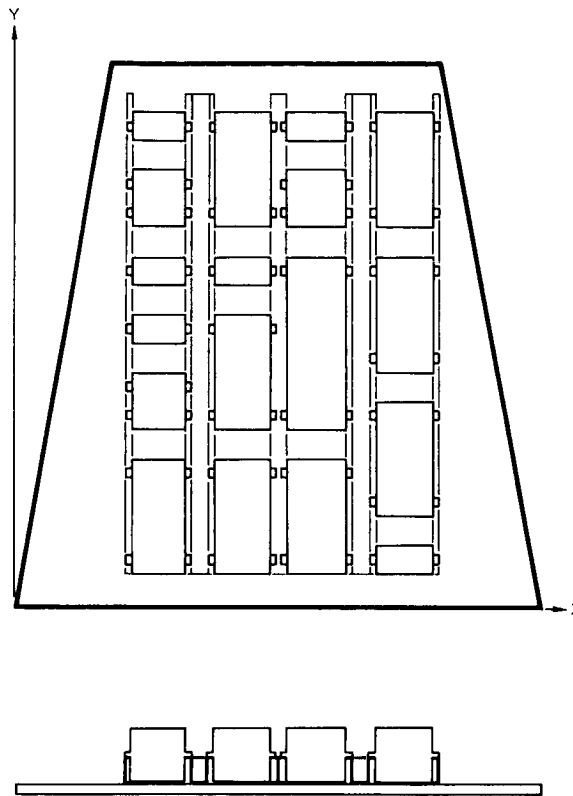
Typical Arrangement of Equipment Mounted to Panel
